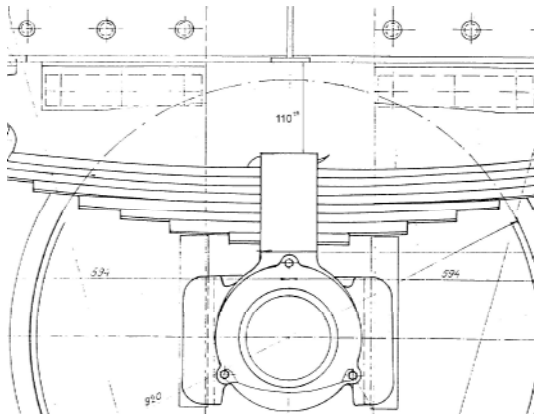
Designed distance between spring buckle and side carrier (when metal stop is removed)
